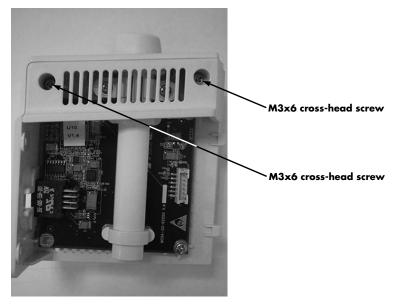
Remove Two (2) M3x6 cross-head screws
